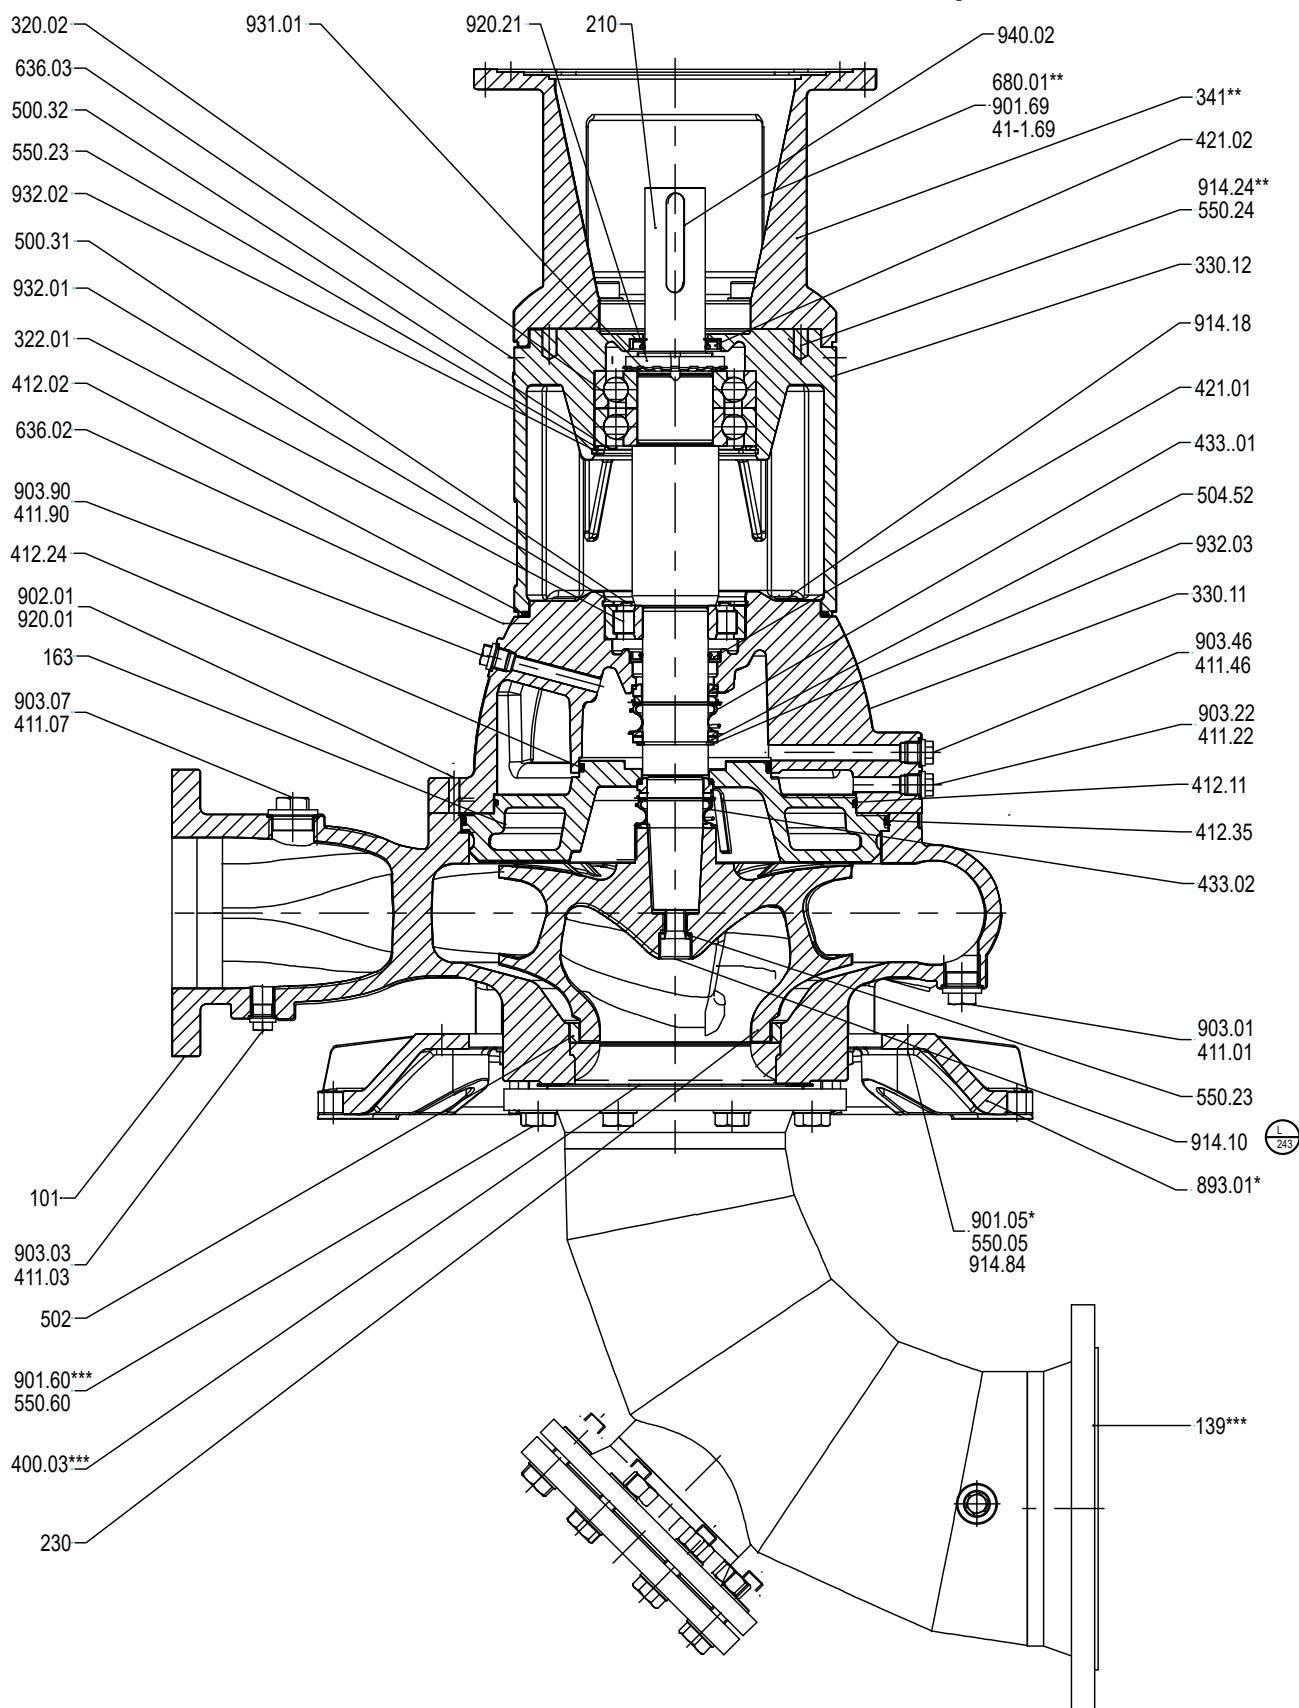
Sewatec with E impeller – pump for underfloor installation and installation with universal-joint shaft
